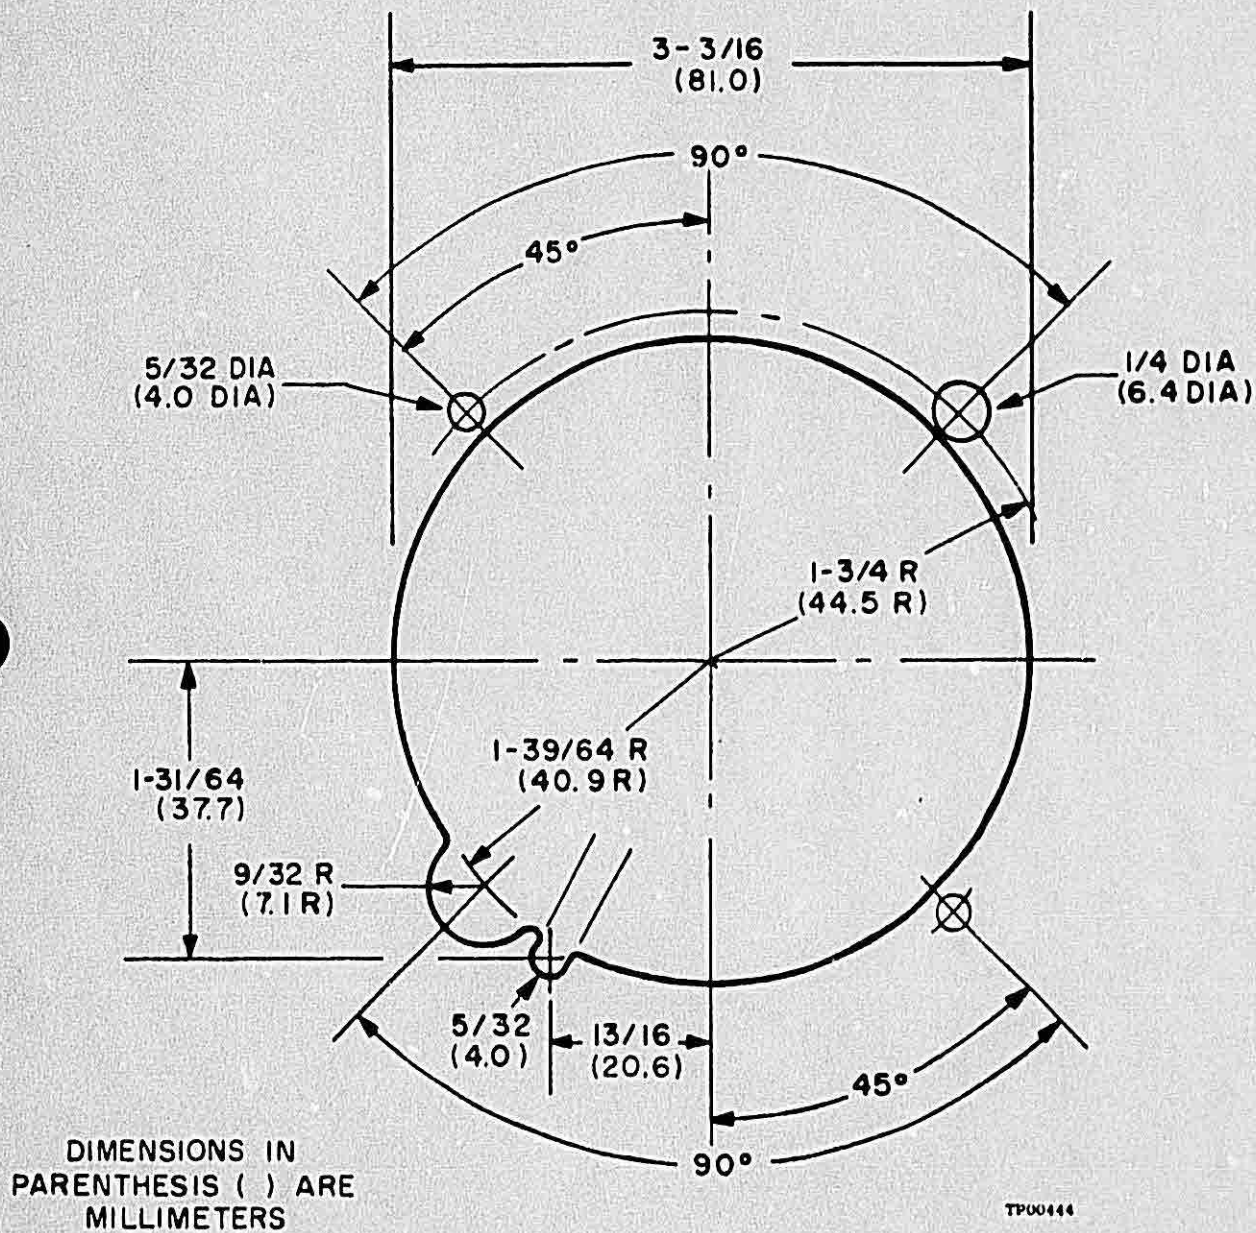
MOUNTING TEMPLATE, REAR MOUNT
